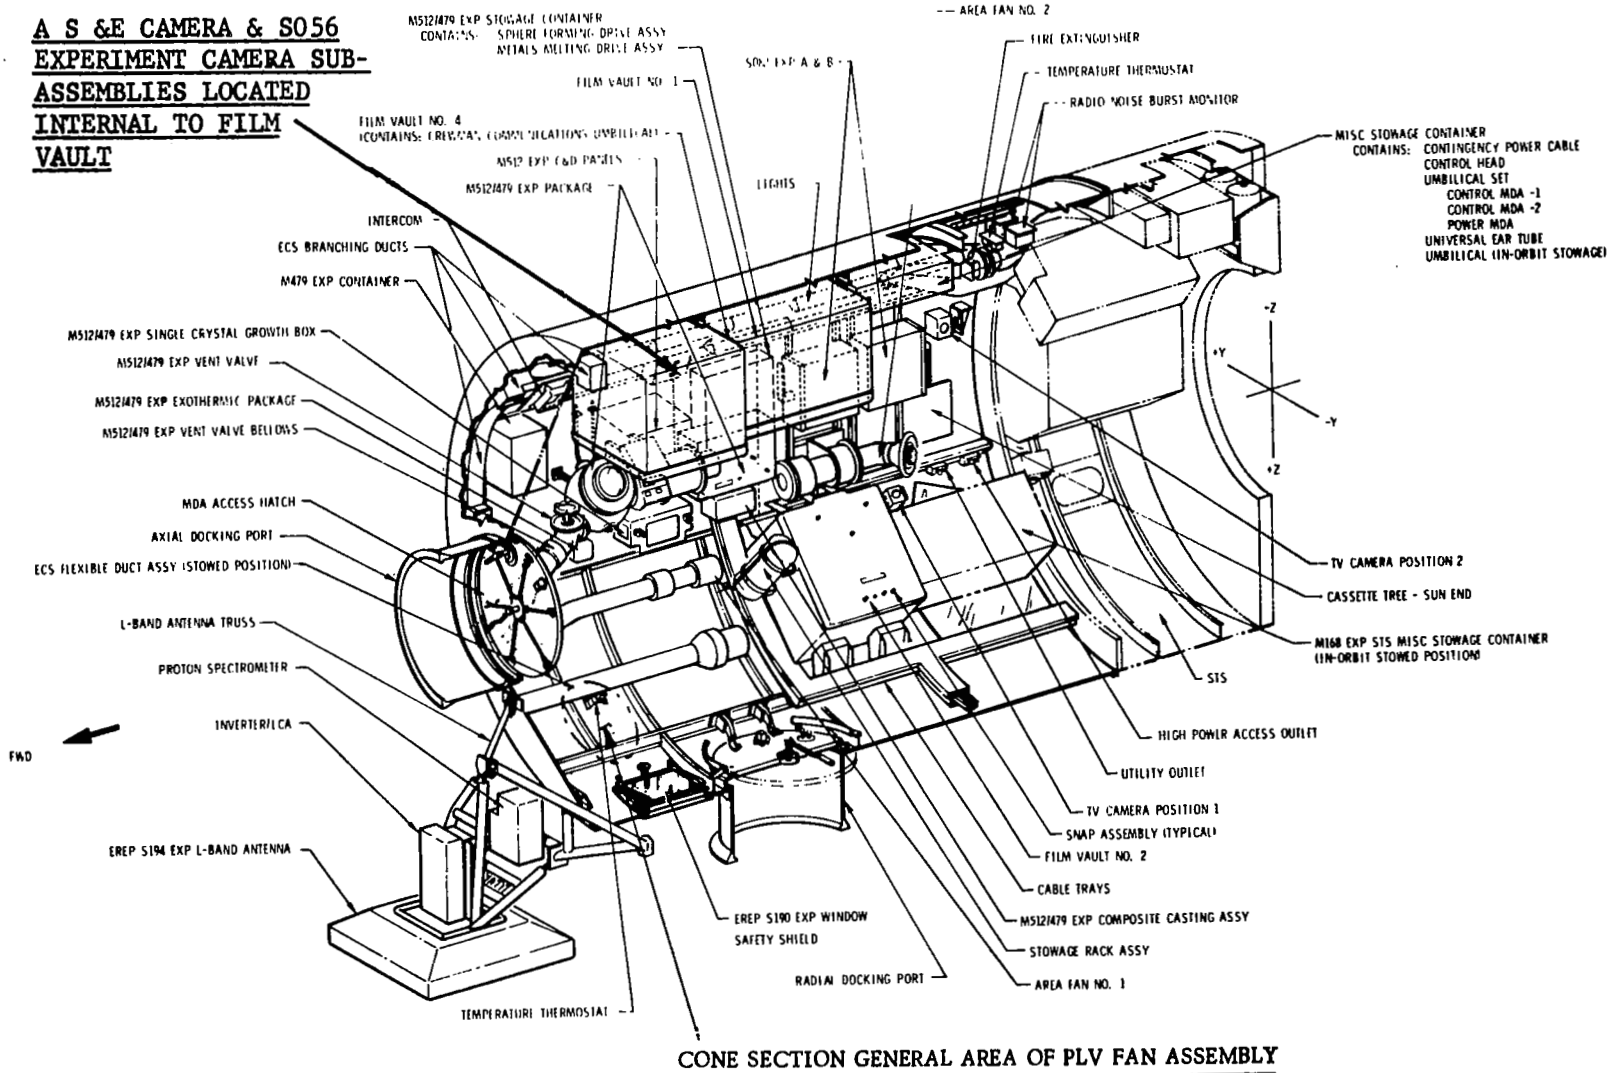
Payload Assembly Test-Multiple Docking Adapter, +Y Section
